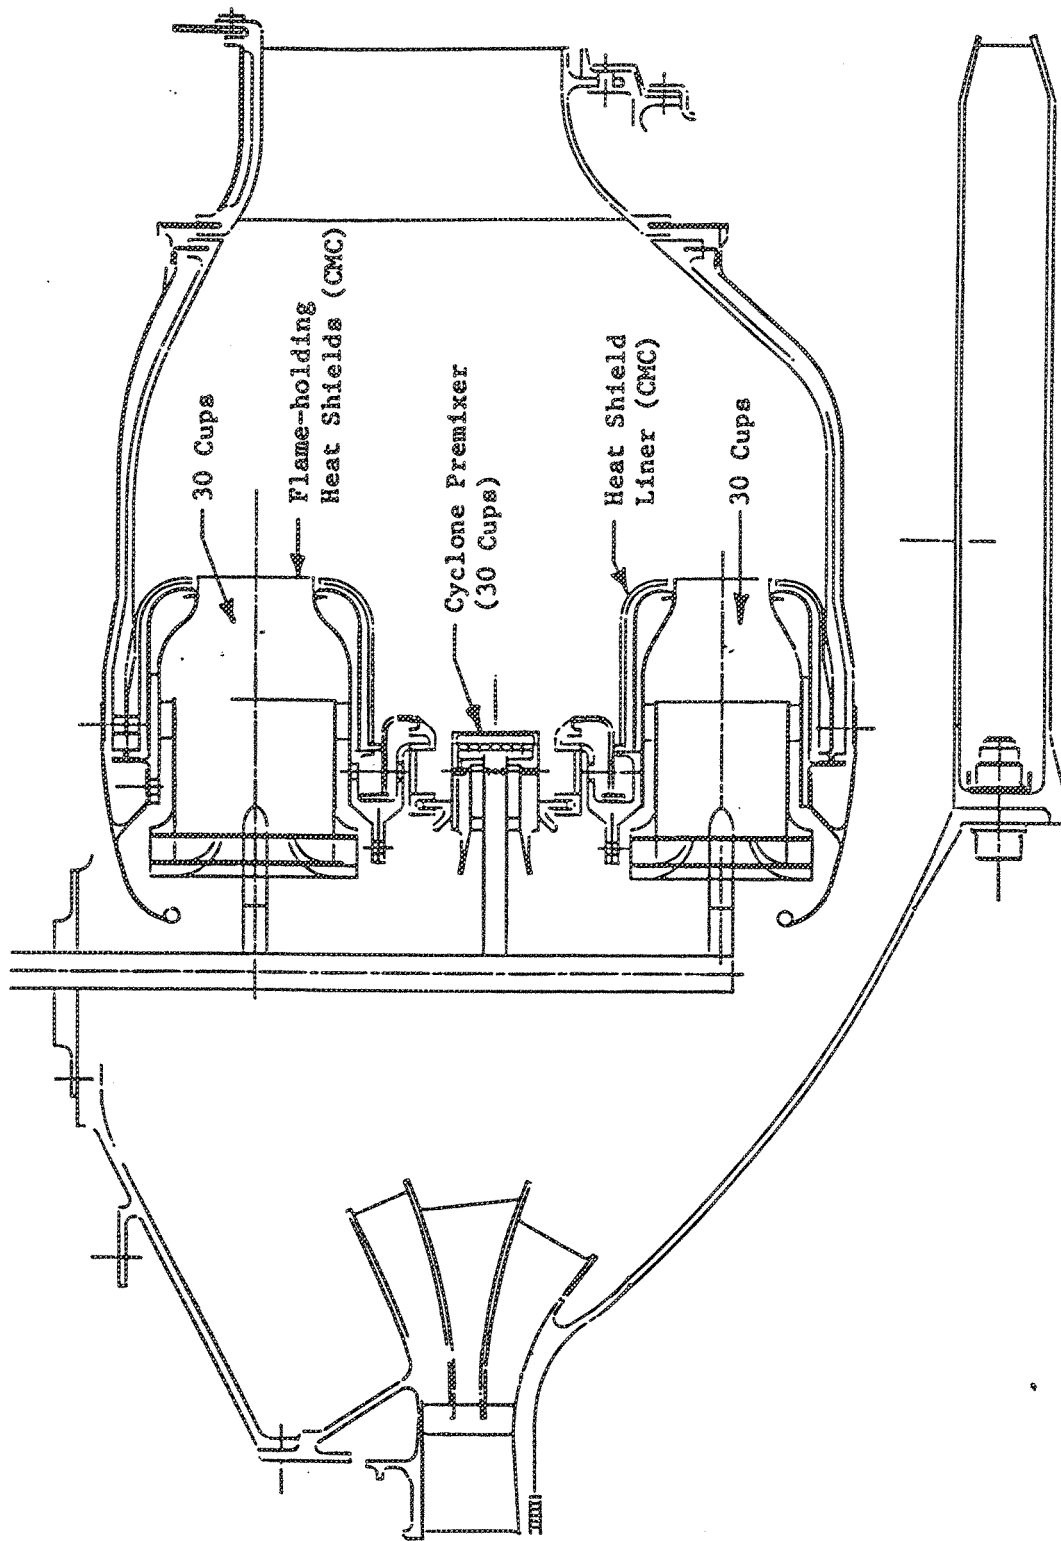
The Revised Swirl-Jet Combustor Layout.
